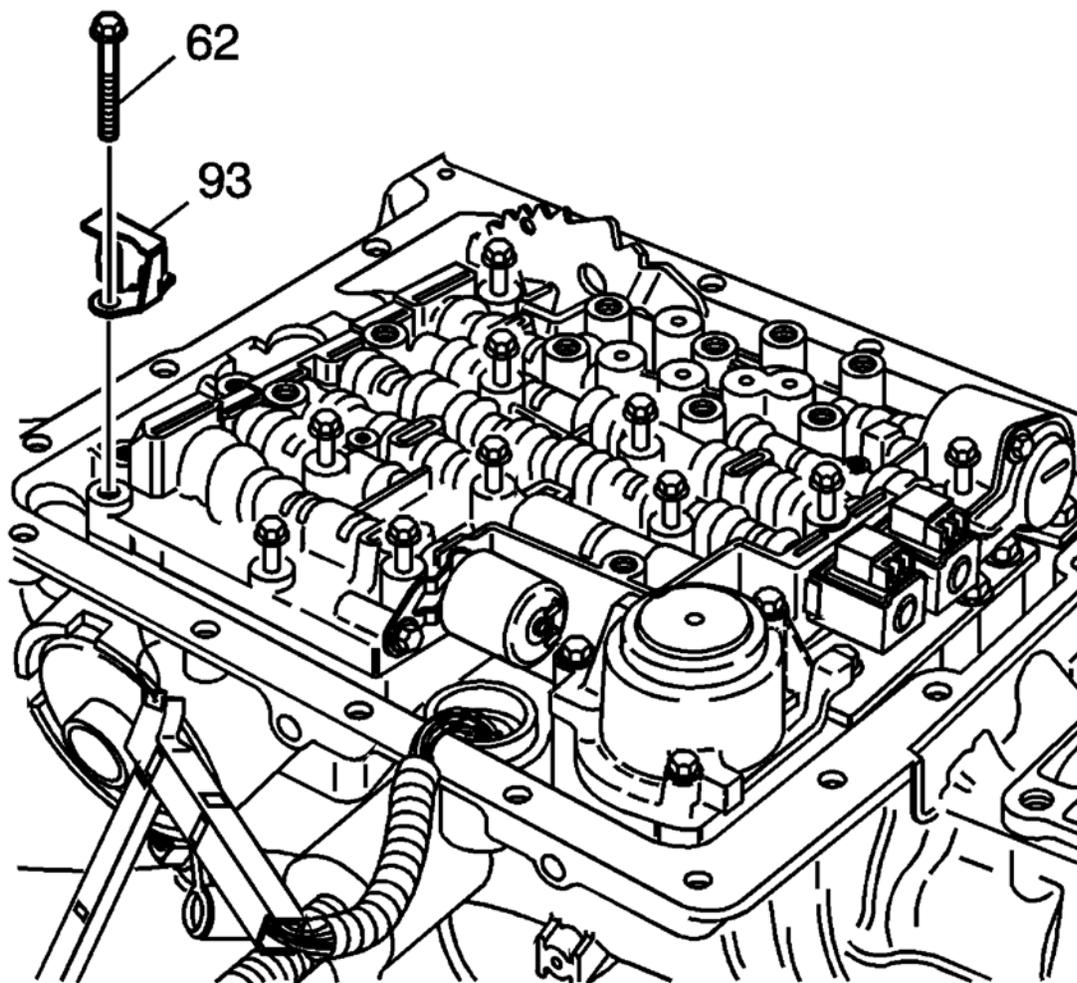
Fluid Level Indicator Stop Bracket & Valve Body Bolts
